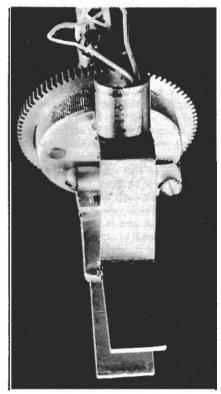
COMPLETED FINGER-TYPE end-effector. Gear is non-functional, but adds to appearance.
